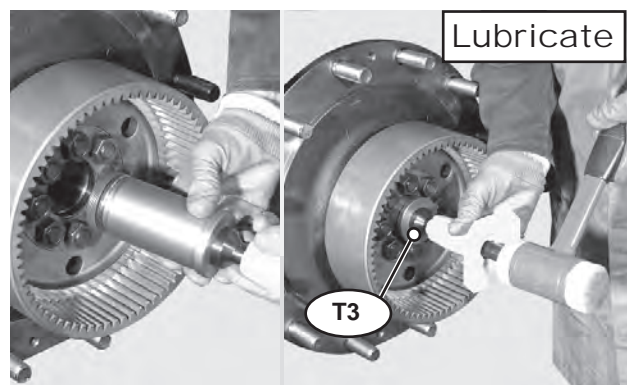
Lubricate and fit the seal ring (21) and guide ring (20) onto tool T3 (See drawing T3 p. 26); install the rings into the arm.
